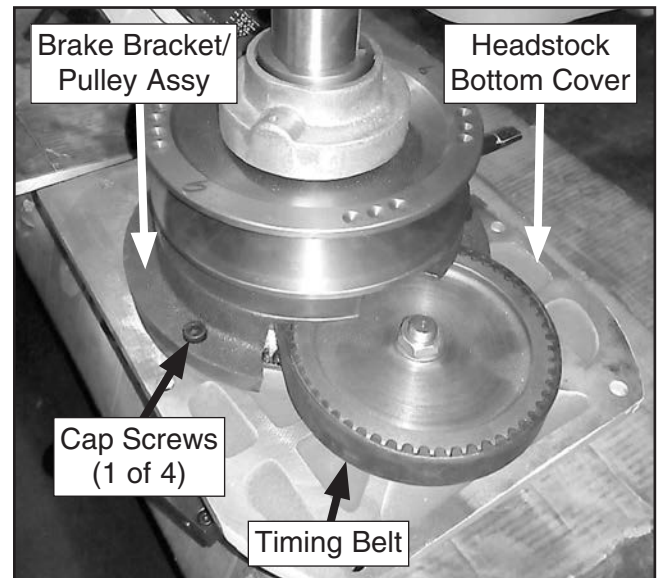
Cap screws must be removed from speed changer plate before disassembling headstock.
